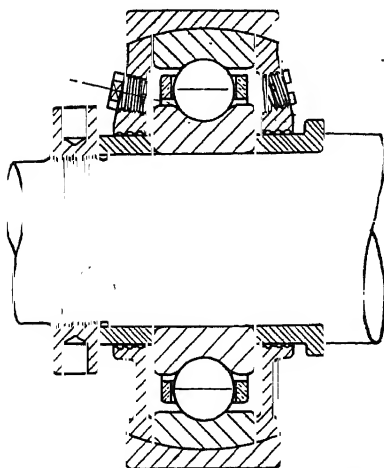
The single-row self-aligning wide-type ball journal bearing.
